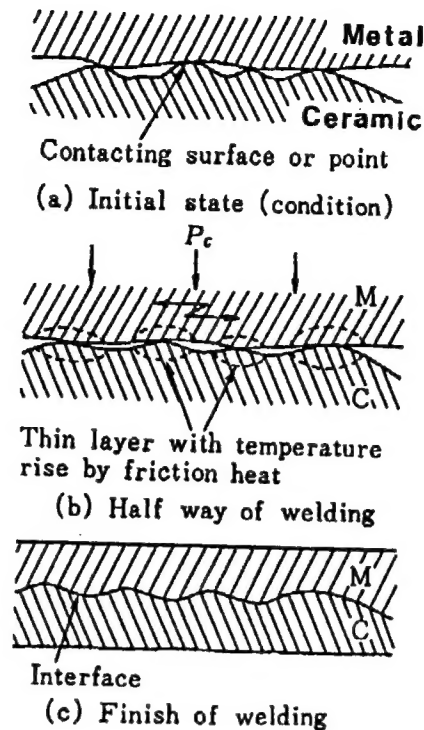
Deformation Behaviors of Material Surfaces in Ultrasonic Welding
